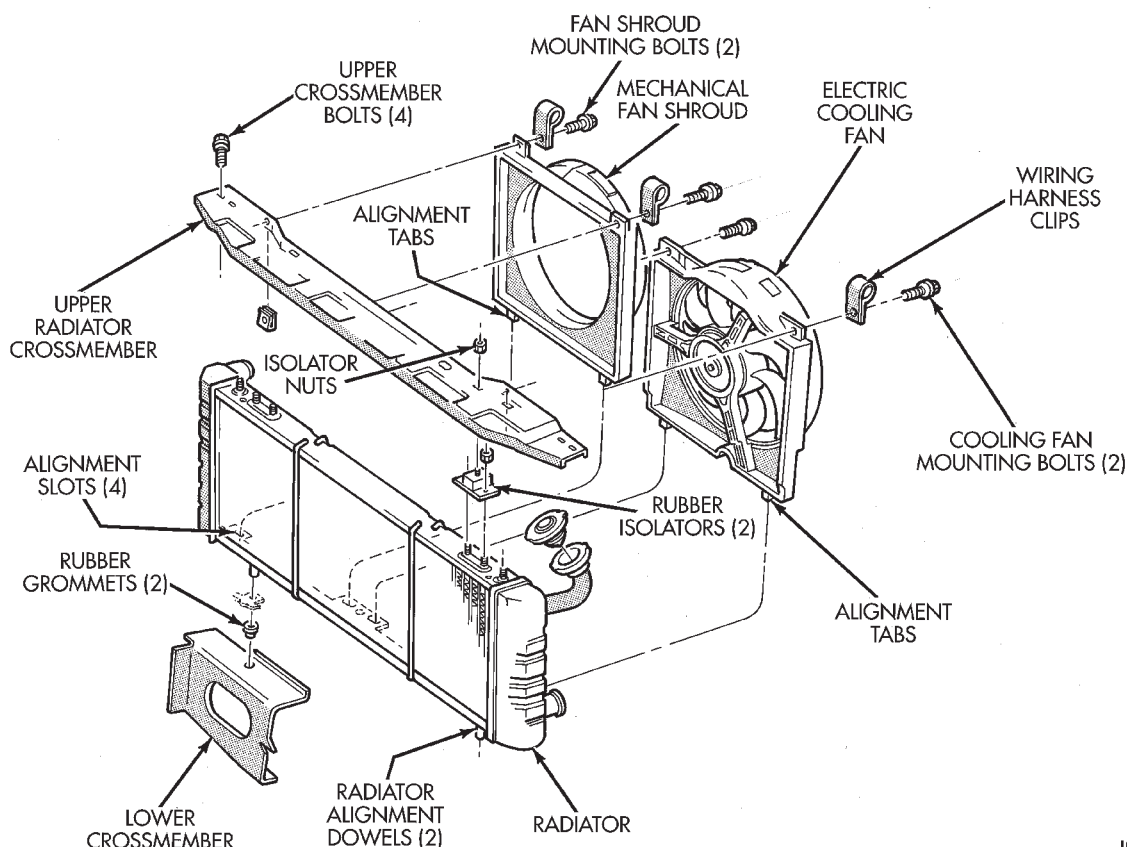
Auxiliary Electric Cooling Fan and Fan Shroud—Typical
